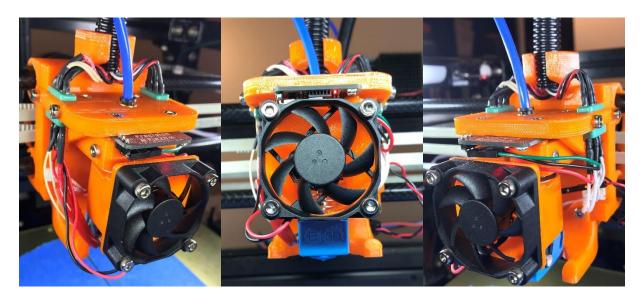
Hotend assembly mounted on Hypercube Evolution printer (300 mm  $\times$  300 mm). The mount will bolt directly on the original x-carriage designed by SCOTT3D. There are other options for x-carriages in the files section of the Thingiverse page.
